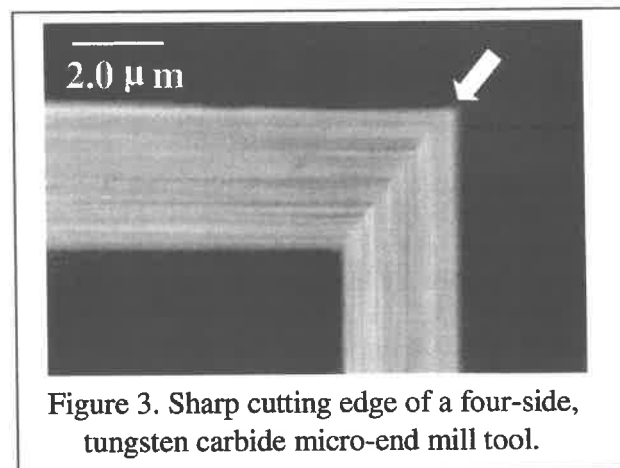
Sharp cutting edge of a four-side, tungsten carbide micro-end mill tool.
